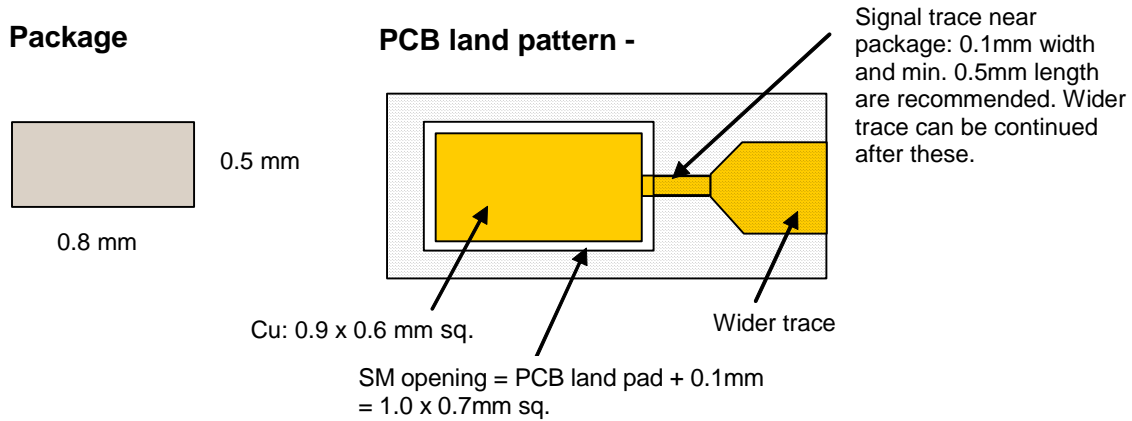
Incorrect PCB Top Metal Pattern Under Package
